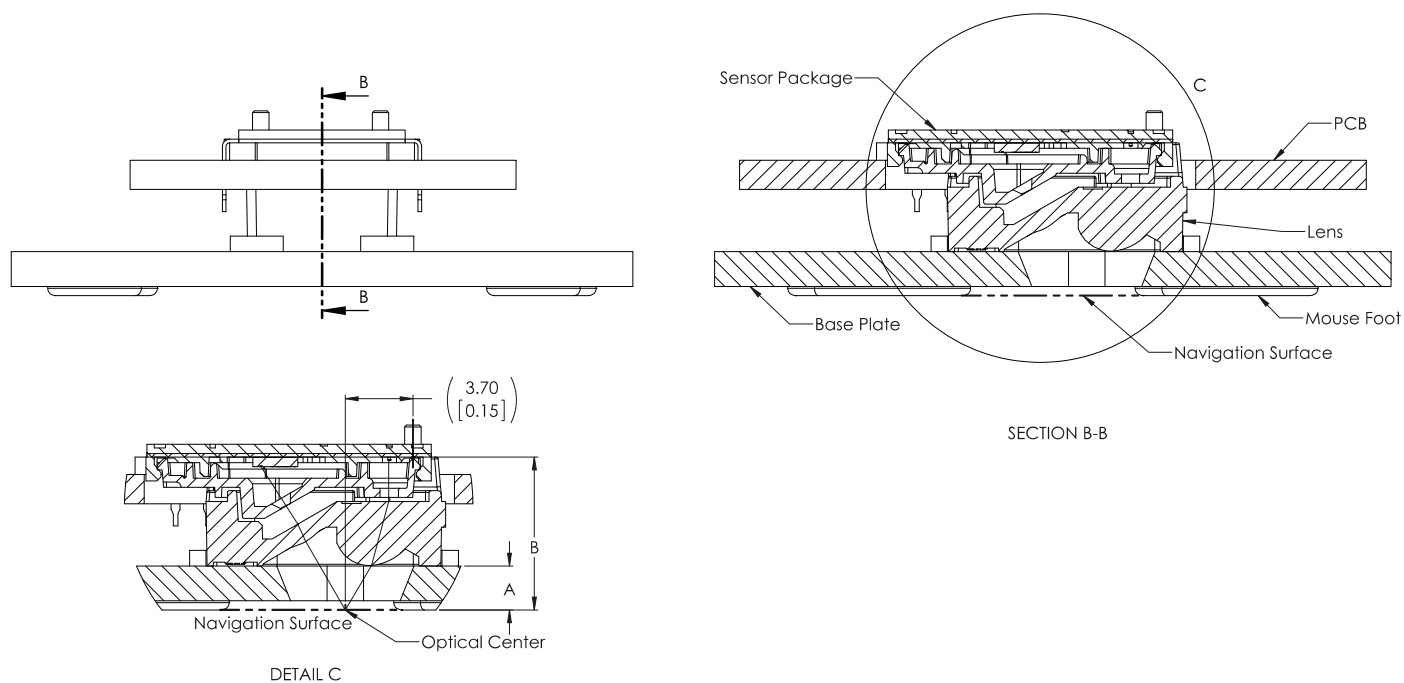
PMW3610DM-SUDU optical system assembly (side view)
